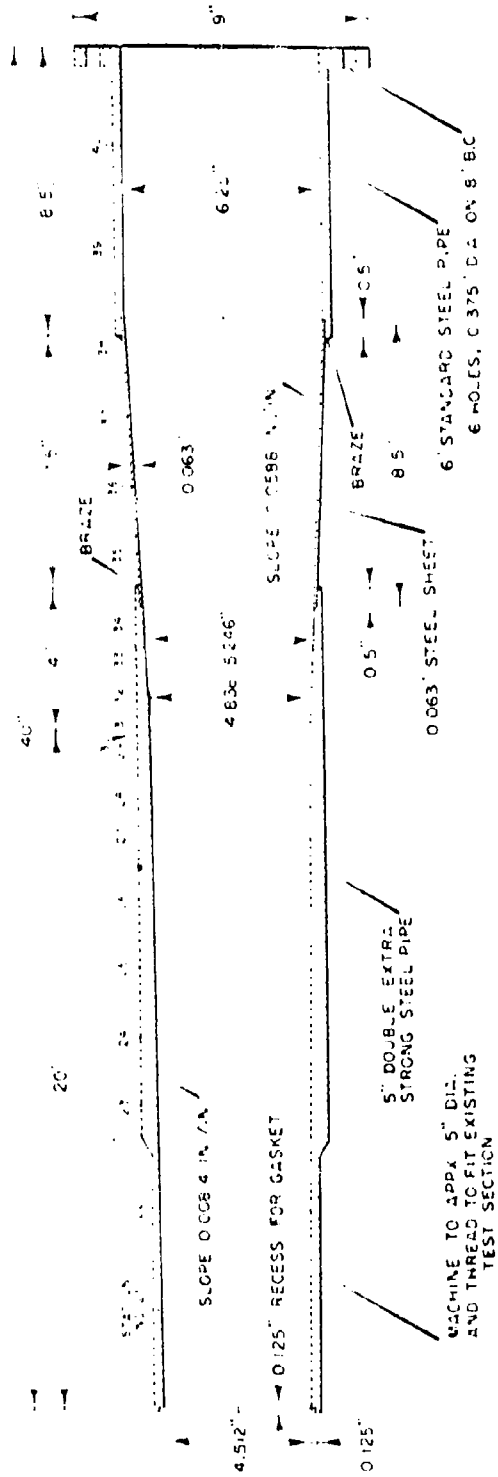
DETAIL DRAWING OF OUTER SHELL
